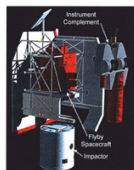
Primary Components of the Deep Impact Flight System (Exploded View)¹²
